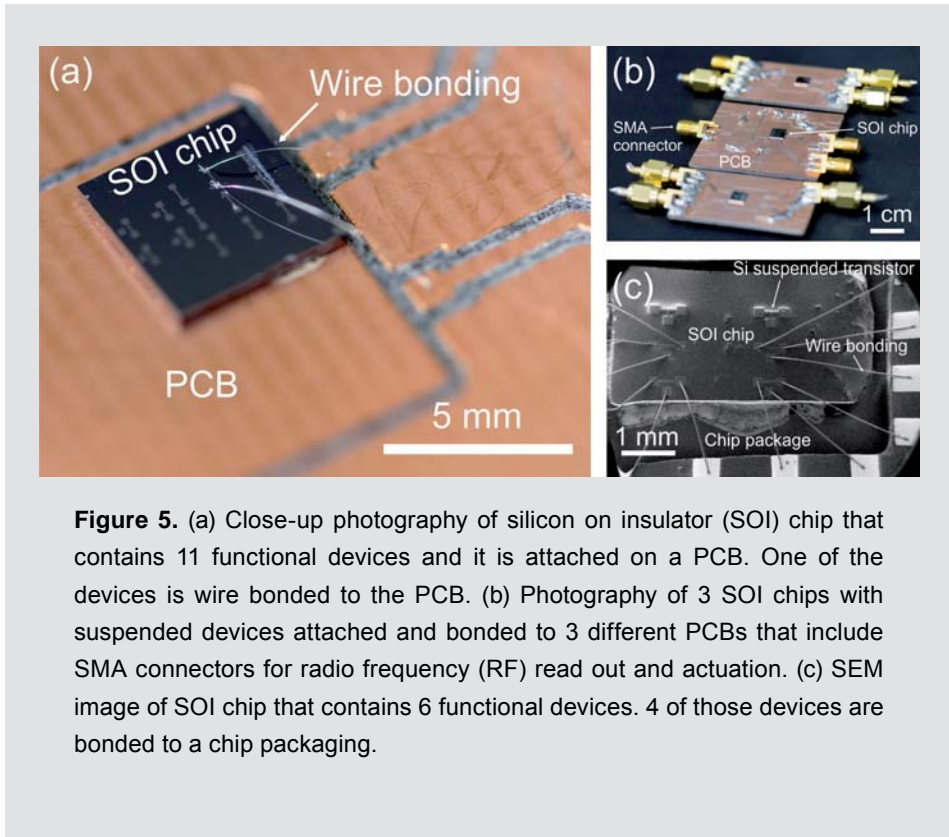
(a) Close-up photography of silicon on insulator (SOI) chip that contains 11 functional devices and it is attached on a PCB. One of the devices is wire bonded to the PCB. (b) Photography of 3 SOI chips with suspended devices attached and bonded to 3 different PCBs that include SMA connectors for radio frequency (RF) read out and actuation. (c) SEM image of SOI chip that contains 6 functional devices. 4 of those devices are bonded to a chip packaging.
